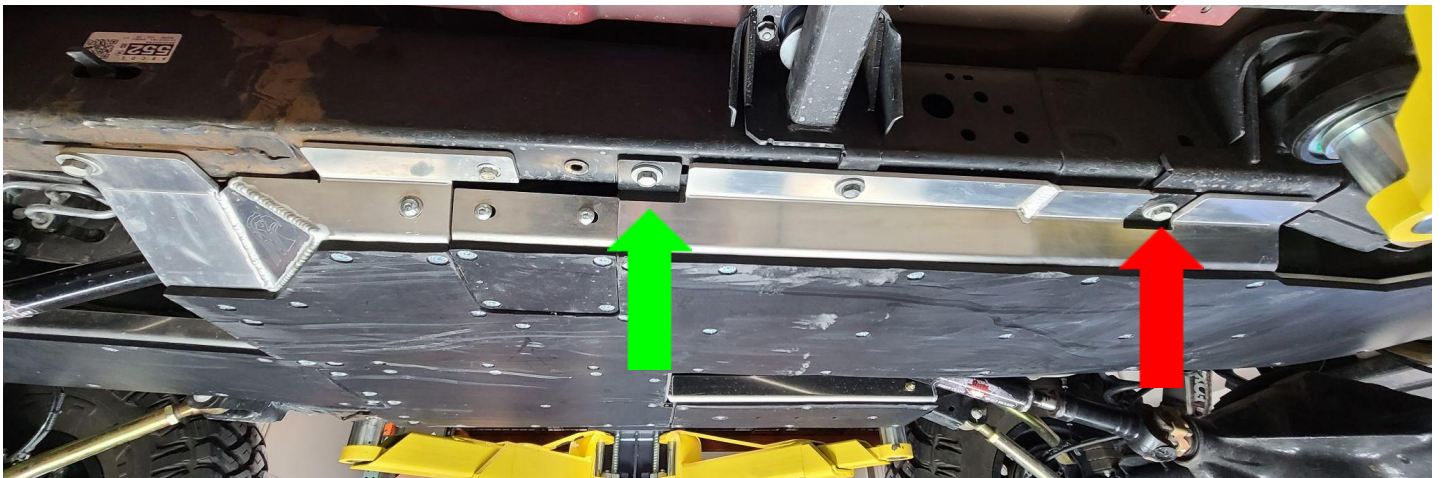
Driver side of vehicle shown. The green arrow calls out the driver side frame mounting location for crossmember F (Figure 3 Item #4). The red arrow call out the driver side frame mounting location of fuel tank support I (Figure 3 Item #5). Both of these mounts will utilize factory hardware Please note, at this time the aluminum skids should not be installed
